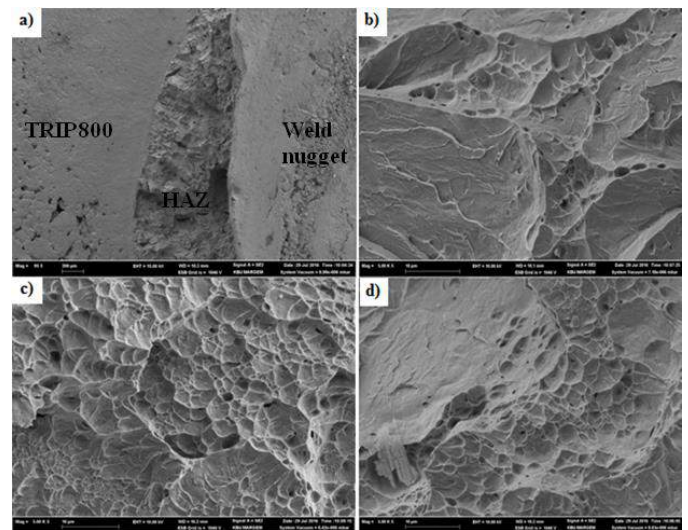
The fracture characteristics of PF mode in spot-welded DP600/TRIP800 dissimilar steel couple a) fracture surface at low magnification, b,c,d) fracture surface at high magnification
